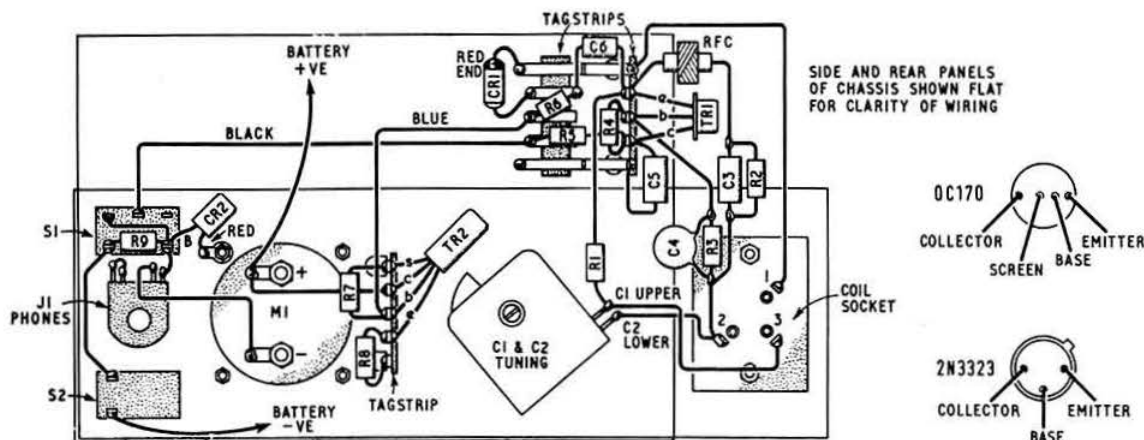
Wiring diagram and component layout for the dip oscillator.
